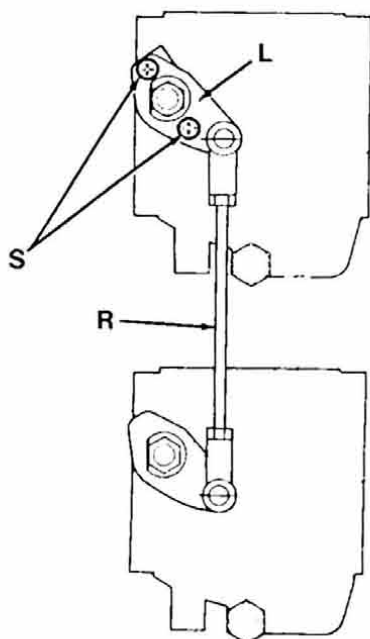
Refer to text to synchronize carburetor throttle valves.
